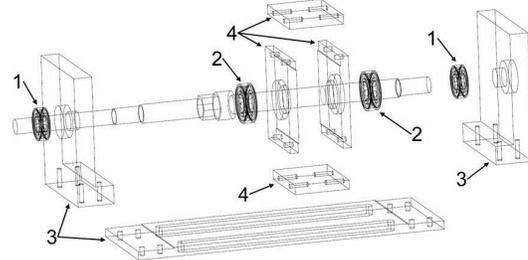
Schematics of the Rolling bearing test rig used for the investigation.
